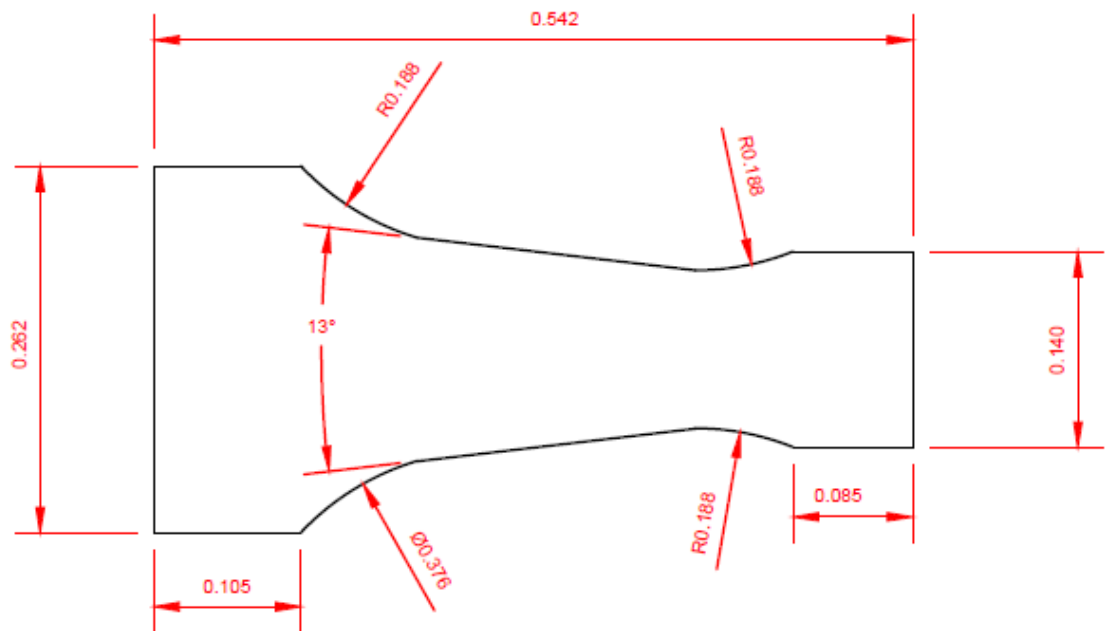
Sketch of specimen type-1 (all dimensions are in inches).
